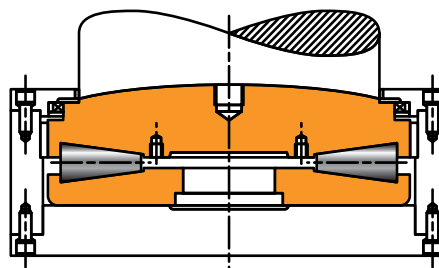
Typical screwdown support configuration using a TTHDSX thrust bearing.
